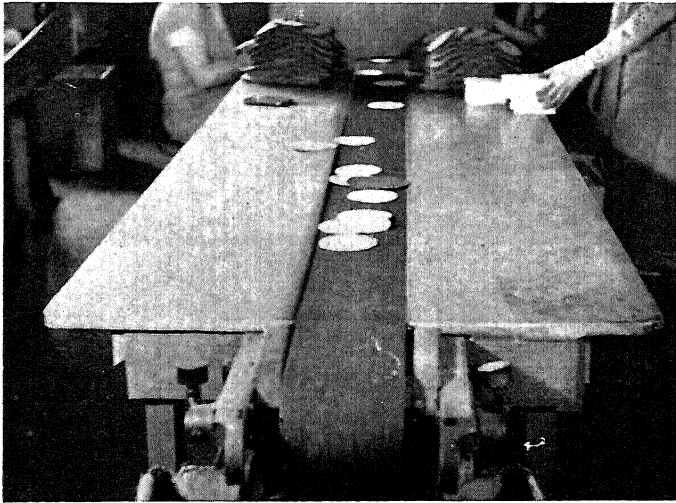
Typical belt conveyor for carrying material to and from operators.
